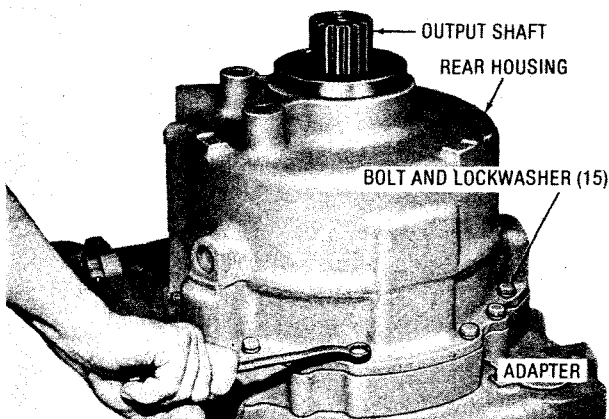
Removing rear housing bolts (TRT 2221-3, 2421-3 with overdrive)
